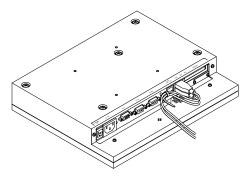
Attaching the USB cable removal prevention clamps $\langle 3/3 \rangle$
